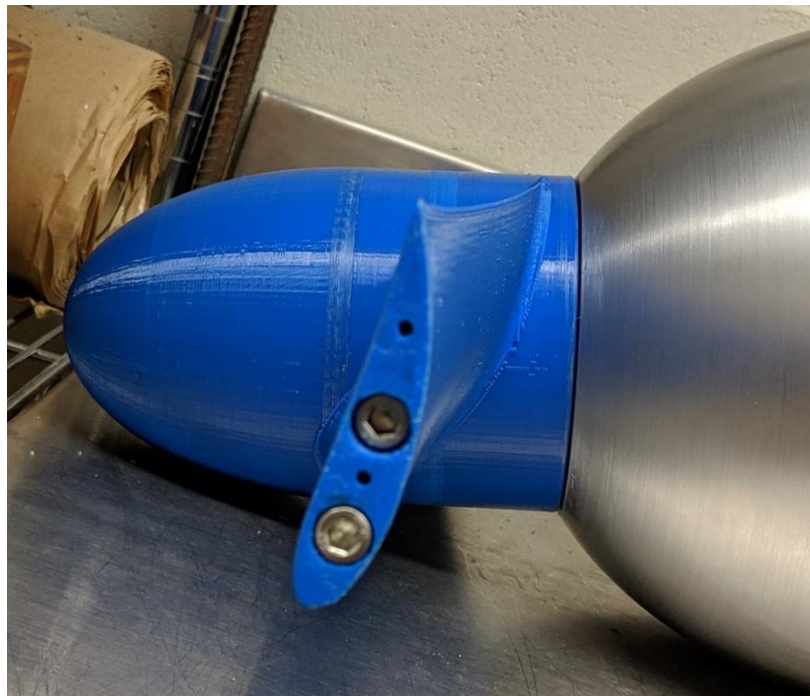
The 3D printed impeller is held under compression by a pair of steel rods running across the impeller. The steel rods provide the structural integrity to the impeller assembly.
